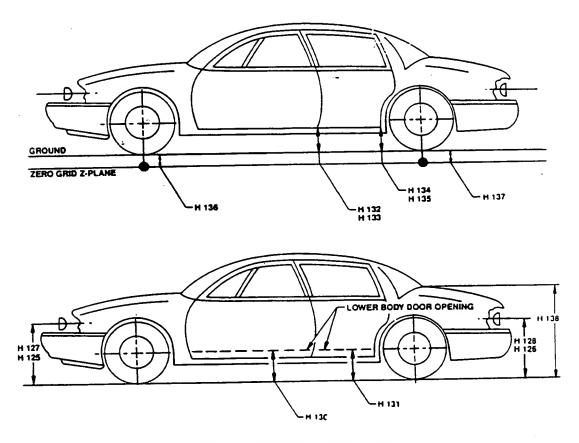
EXTERIOR DIMENSIONS, HEIGHT
